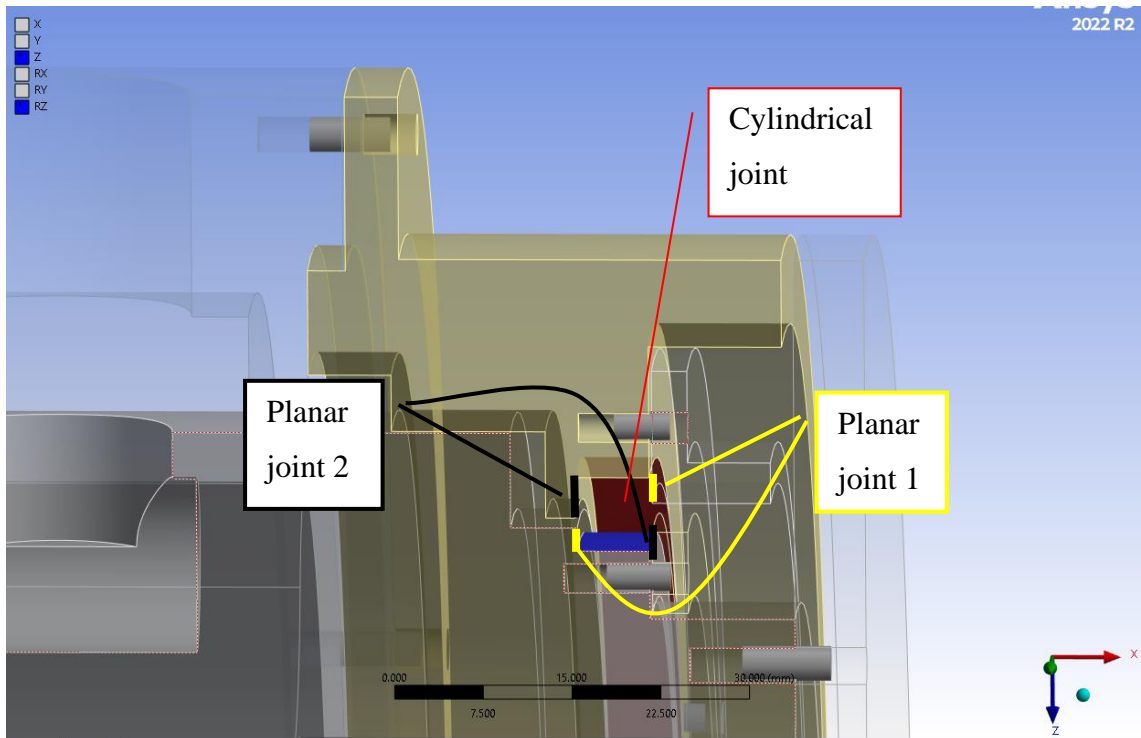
Lower bearing modeled as cylindrical and planar joints
